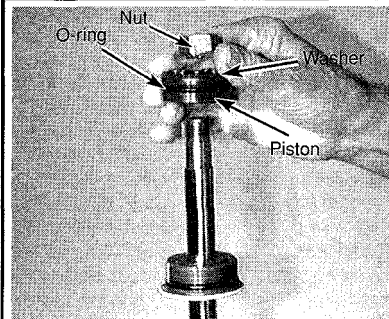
then, assemble the piston, washer and nut, along with the piston components (check ball, plunger, springs and O-ring)
